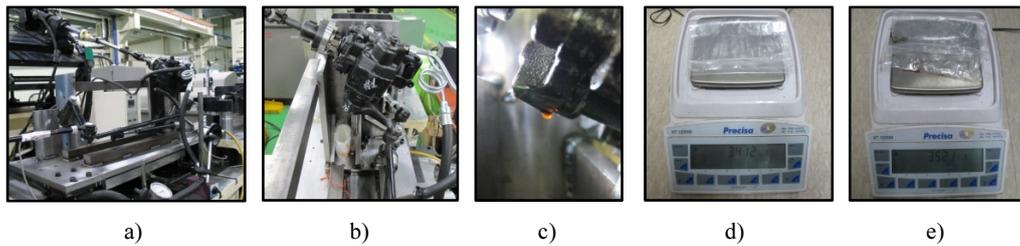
Tested ball and nut steering gear assembly: *a)* Sample mounted in test bench; *b)* leaked oil collection; *c)* oil leaking location; *d)* weight measurement before oil leak; *e)* leaked oil weight
